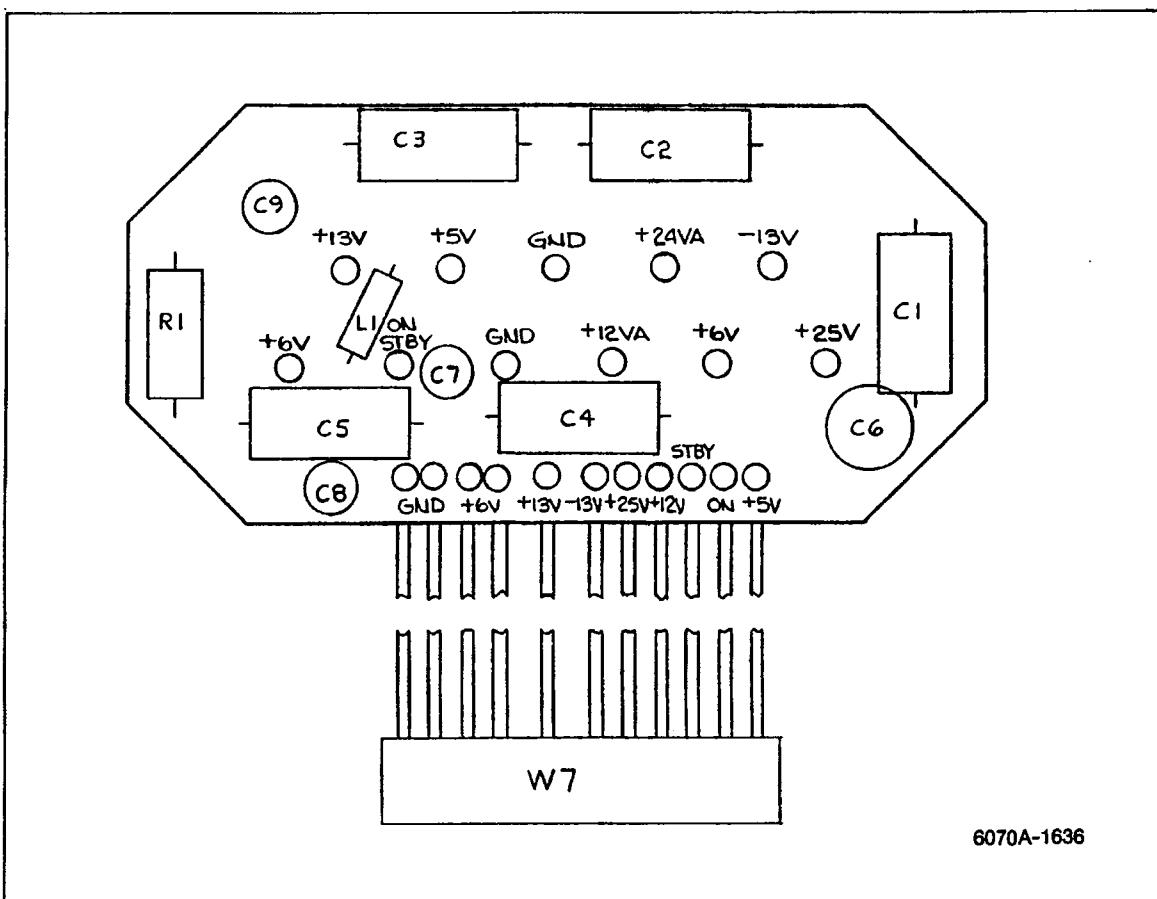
A5A6 Power Supply Capacitor PCB Assembly
